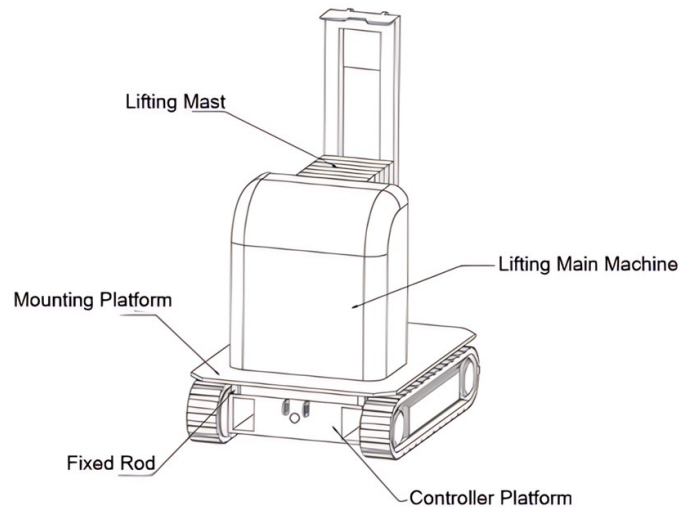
Schematic Diagram of Installation Platform Installation Structure.
